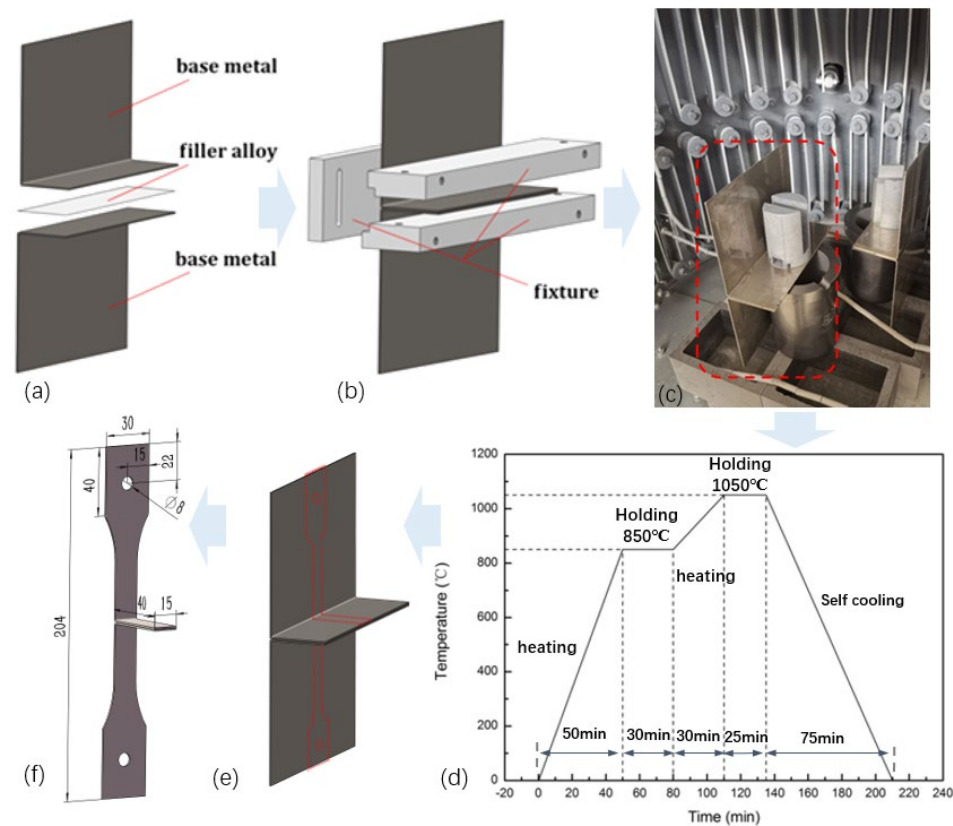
Prefabricated T-type peeling specimen. (a) L-shape base metal; (b) fixture; (c) vacuum brazing furnace; (d) brazing process; (e) the brazing parts; (f) T-type peeling specimen. Adapted with permission from ref. [16]. 2019 Elsevier Ltd.
